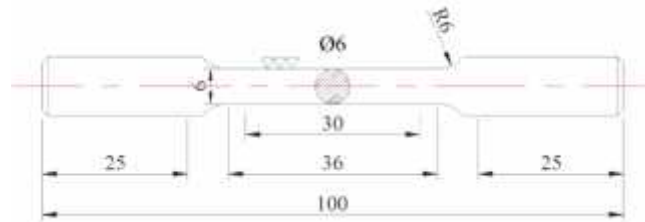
Dimensions of tensile test specimen (unit: mm)
